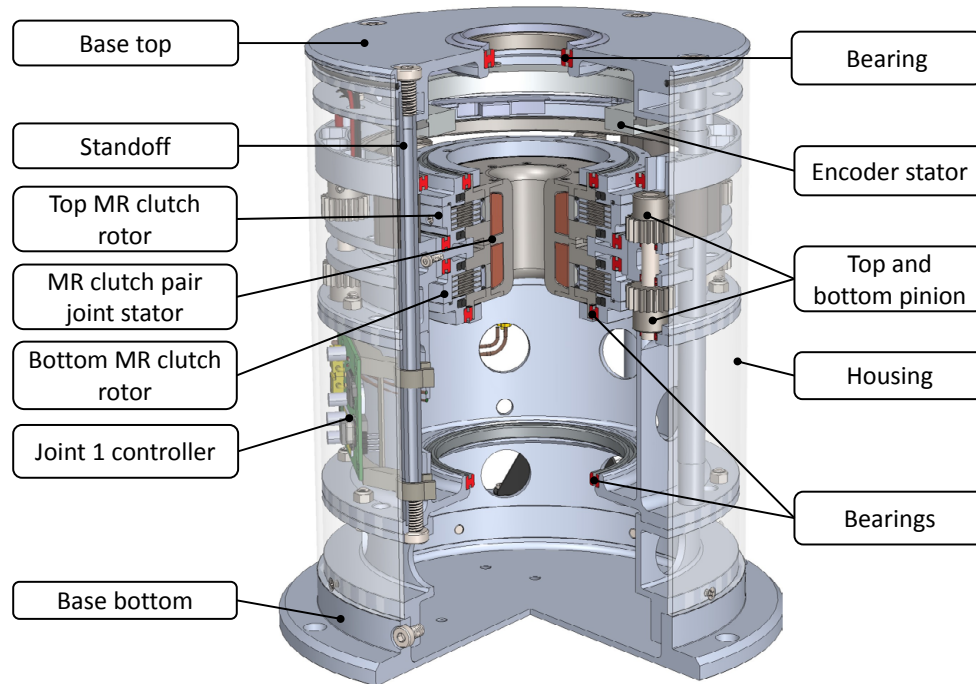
CAD model of link 0 (base) of the manipulator (zonal section view).
